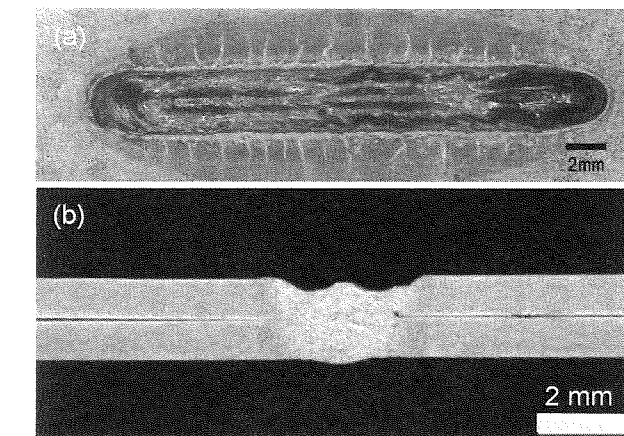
LC³W[®] results for 1 mm thickness hot-dip galvanized steel sheet at output power 4 kW and welding speed 1.5 m/min. (a) appearance of weld bead, (b) cross section.
